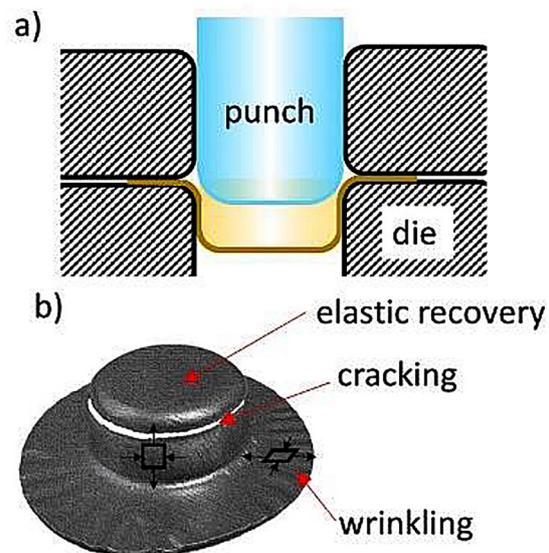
Typical sheet metal defects: (a) schematic drawing, (b) cracking and wrinkling (own elaboration)
